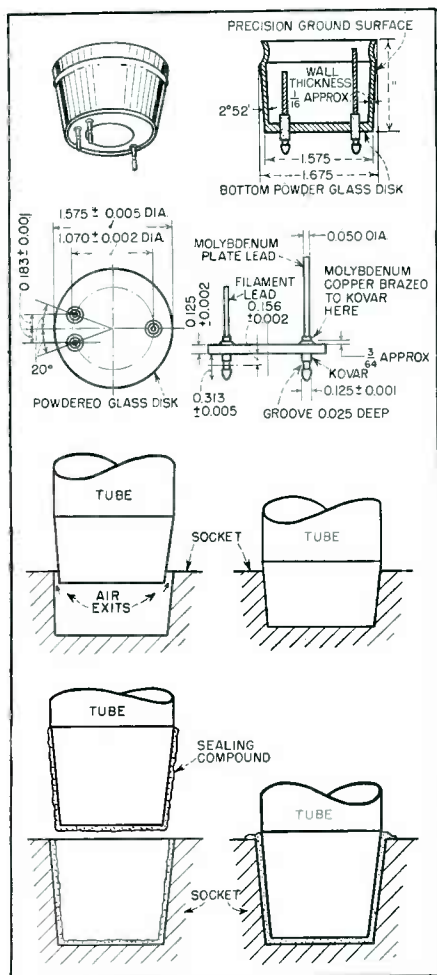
Details of tapered tube base show how air is excluded from pin connections
